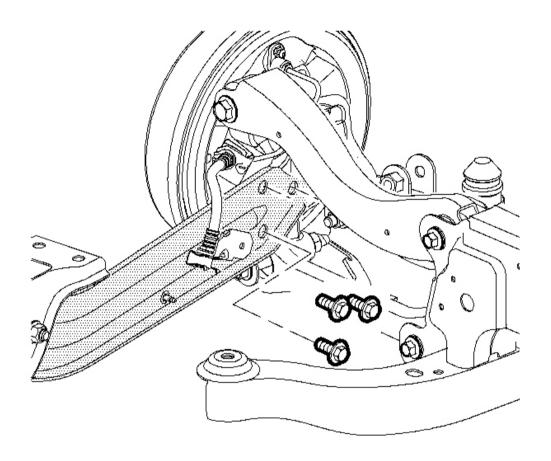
Trailing Blade & Knuckle Bolts Courtesy of GENERAL MOTORS CORP.
